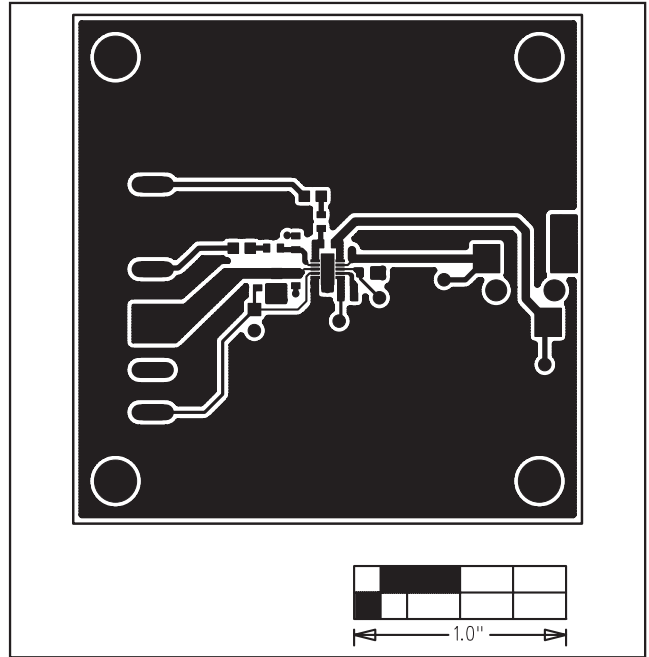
MAX9820 EV Kit PCB Layout—Component Side
